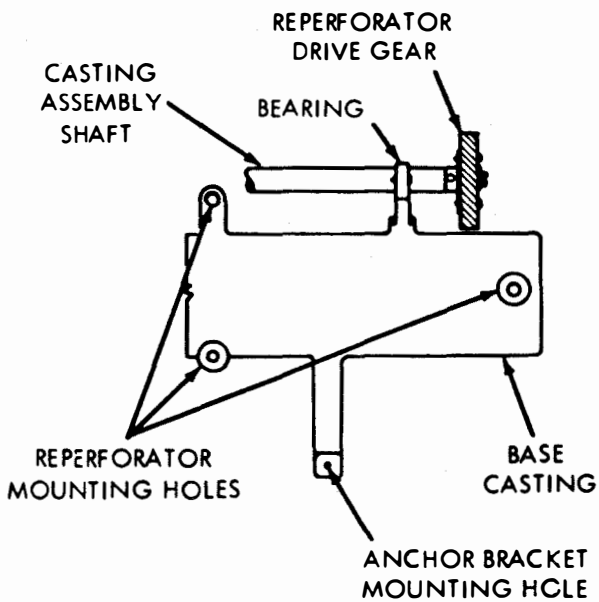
Typing Reperforator Shaft Gear Mesh
